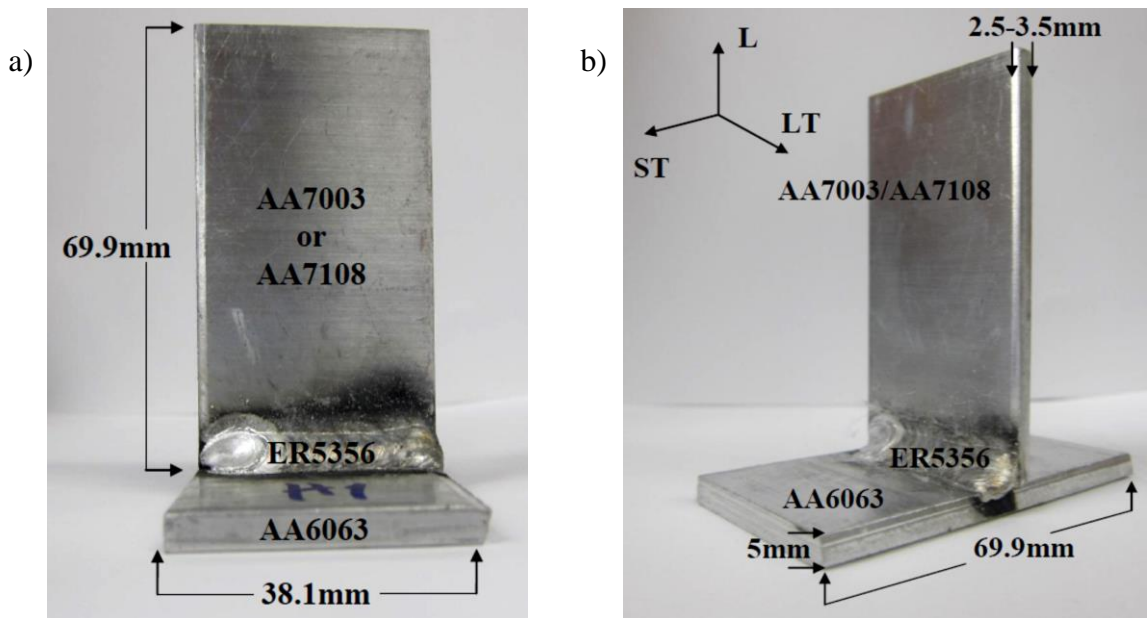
Welded AA7xxx T-joint configuration with all major dimension as seen from (a) the front view and (b) side view. Figure 3.1 b indicates three orthogonal directions used to identify cross-sectional planes.
